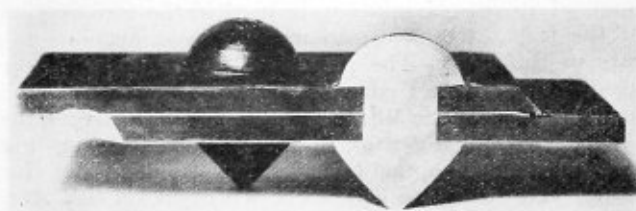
Lap riveted joint, with pure nickel rivets and calk weld
